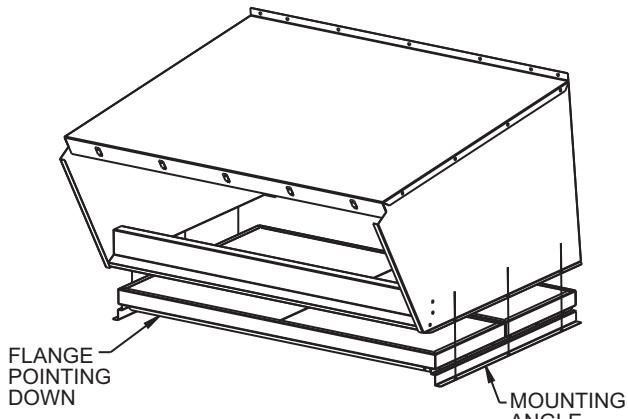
Bottom Filters Installed with Flange Pointing Down
